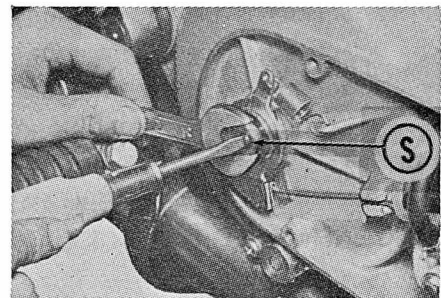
The clutch adjusting screw (S) is located under the cover on right side of engine.
